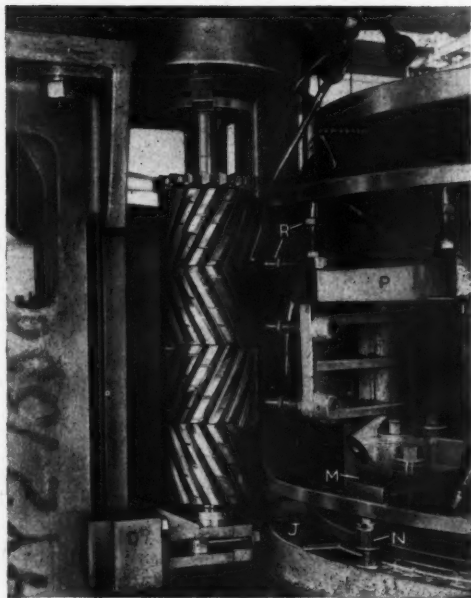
Close-up view of the cutters for milling the facings on the Avon thrust reverser box. A steady bracket to support the end of the cutter arbor has been added to the machine by Rolls-Royce, Ltd.
